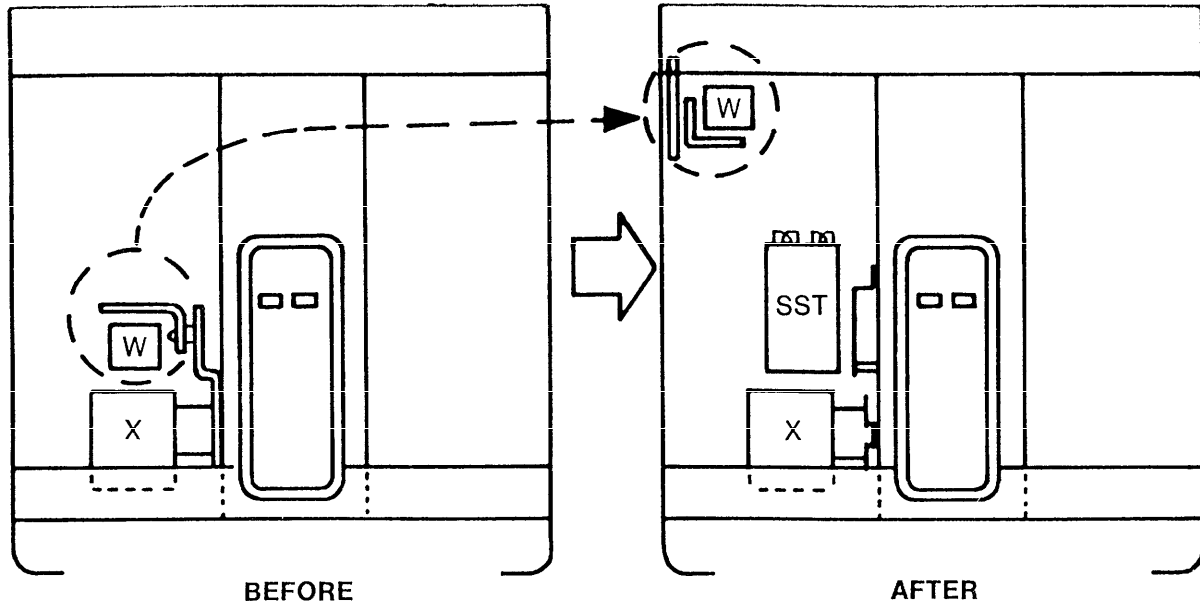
Remounting of “W” and “X” relays — required only on quick-close, electrically operated breakers equipped with EC trip devices.
